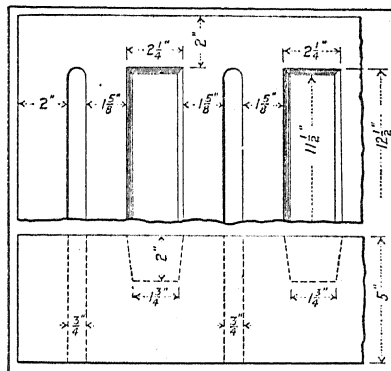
MOLD FOR CHILL TEST SPECIMEN
